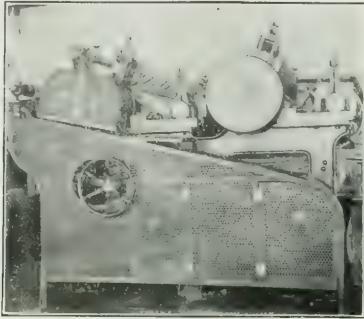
Belts, Pulleys, Etc., Guarded on a Duplex Cutter, with Perforated Sheet-Metal Guard.
